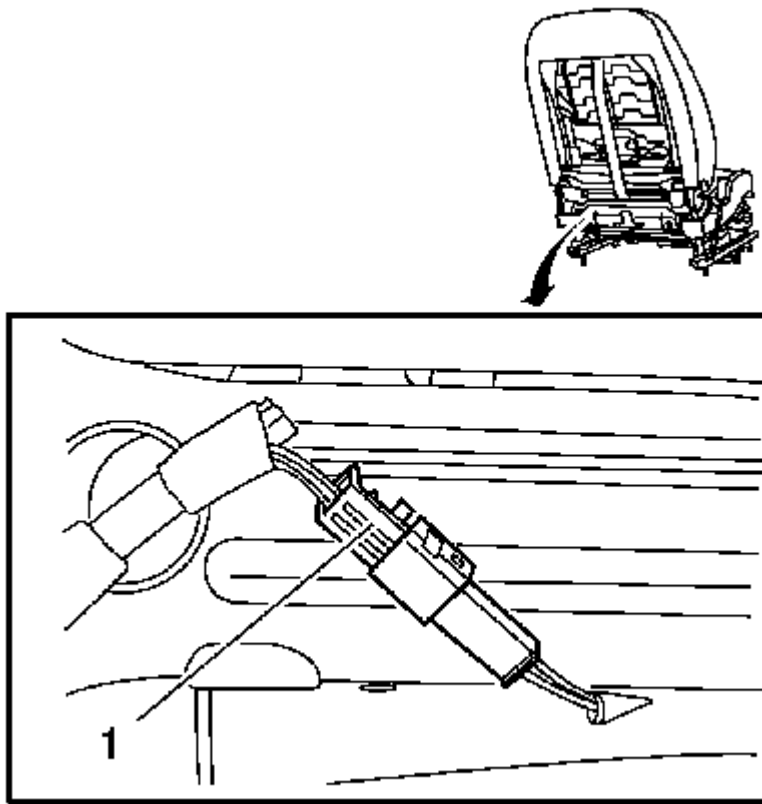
Wiring Harness Connector And Seat Back Cushion Heater
